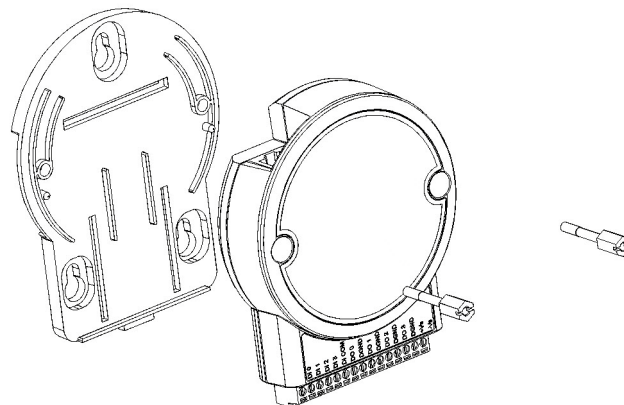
Installing the Mounting Kit for a DIN-Rail
